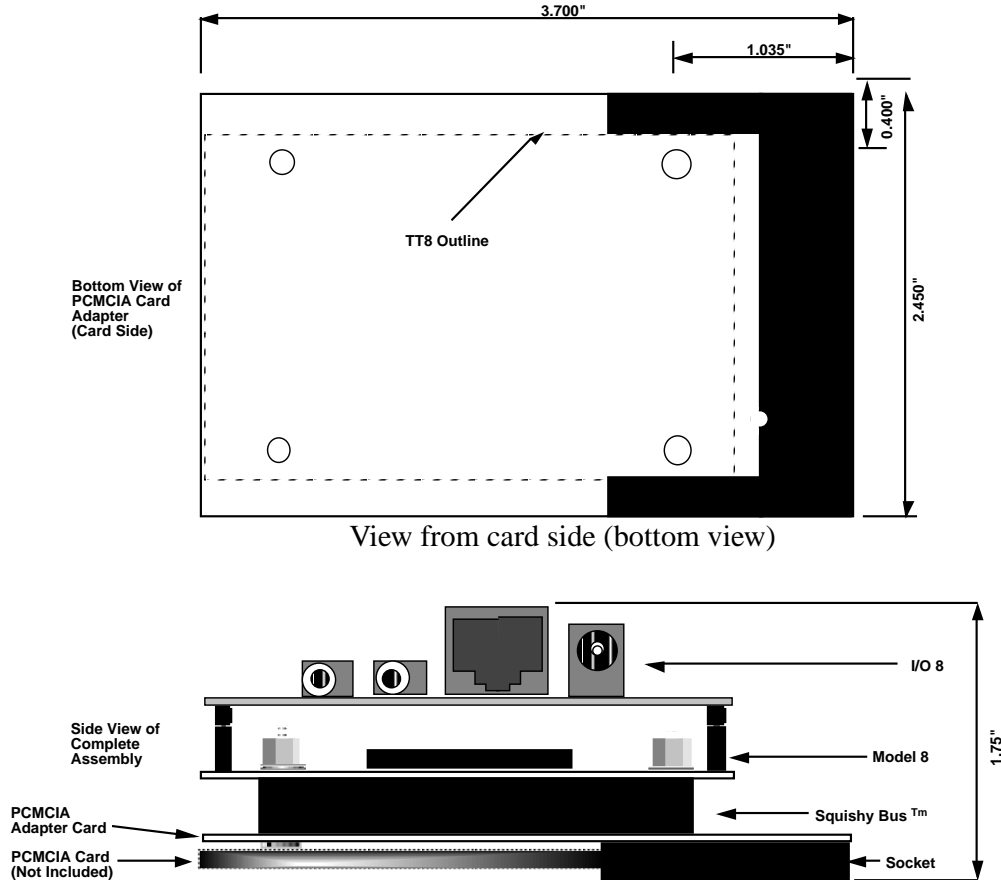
Side View of I/O8, TT8 and PCMCIA Adapter Assembly
